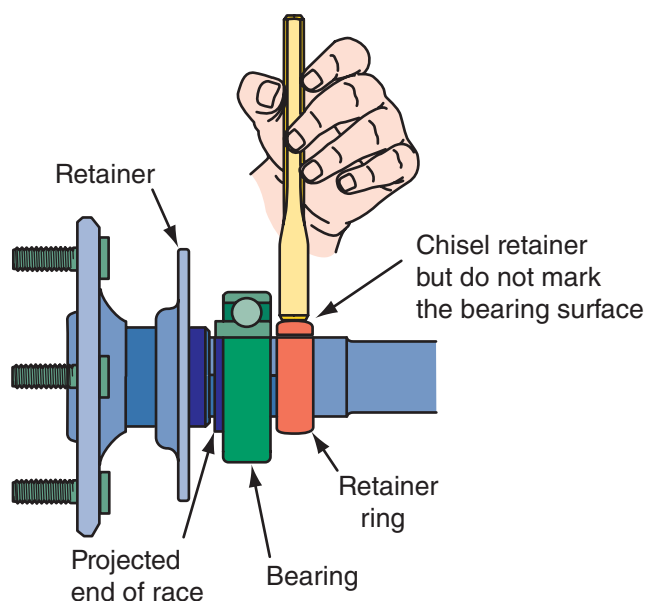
Freeing the retainer ring from an axle shaft.
